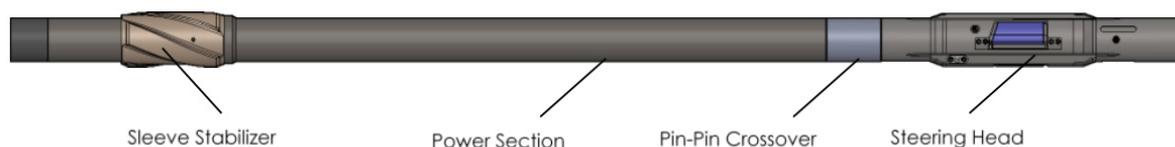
SureSteer™-RSS™-475 Steering Head, Power Section, and Sleeve Stabilizer
